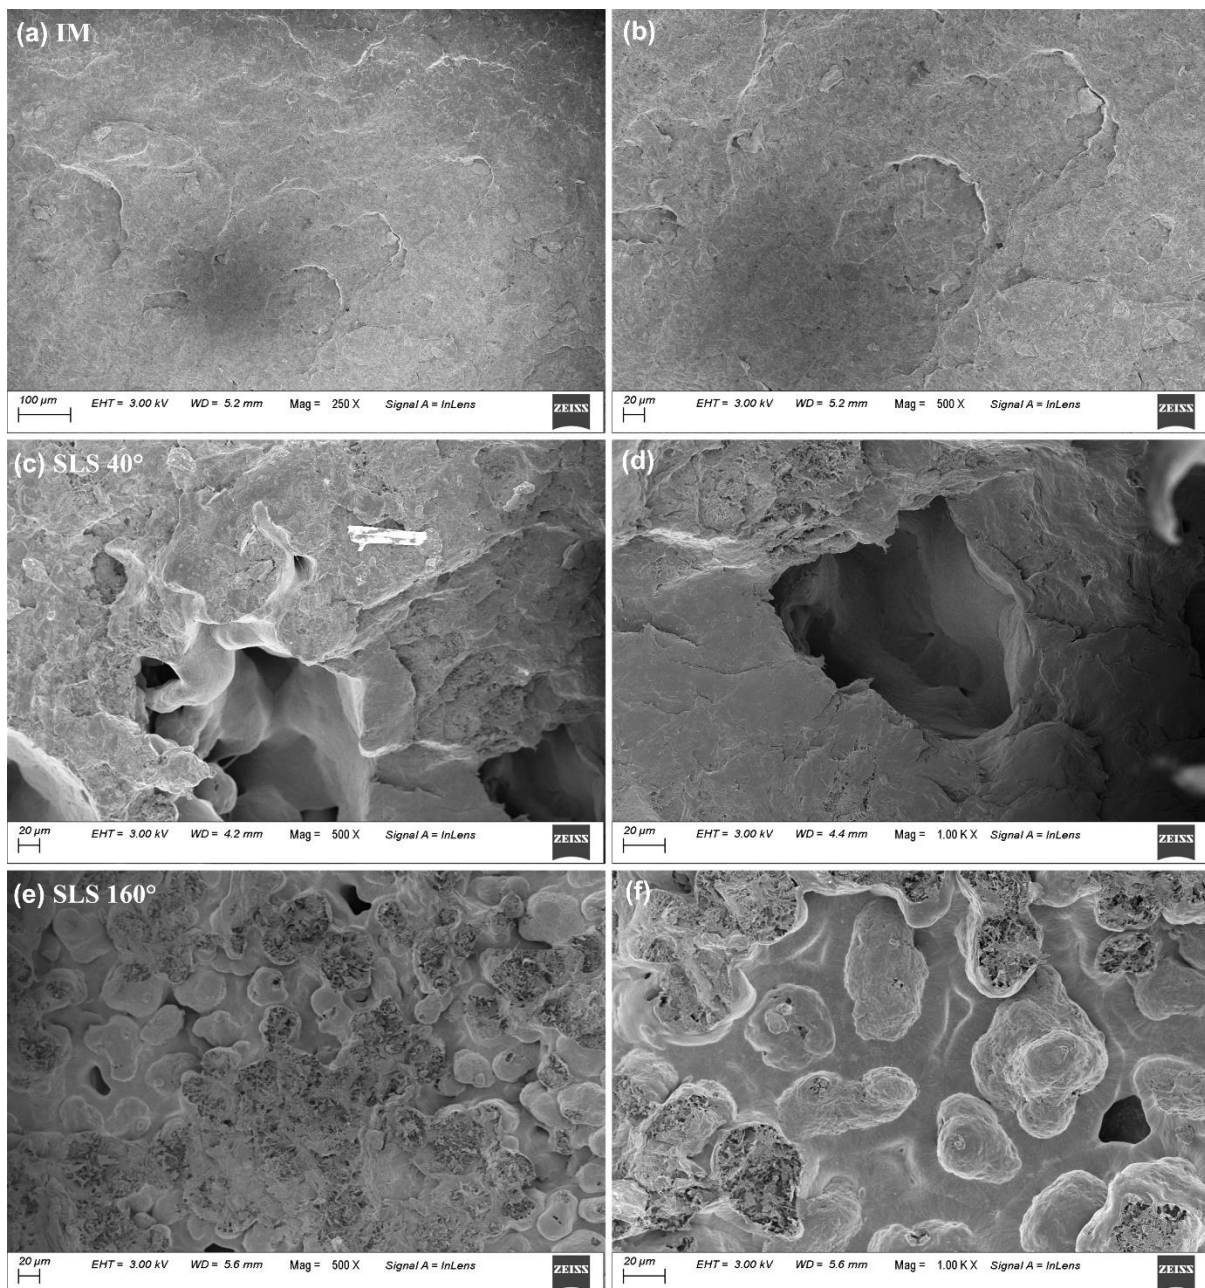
Fracture surfaces of test gears viewed under FESEM. (a, b) Injection-molded gear, (c, d) Selective laser sintered gear tooth 40° configuration and (e, f) Selective laser sintered gear tooth 160° configuration.
